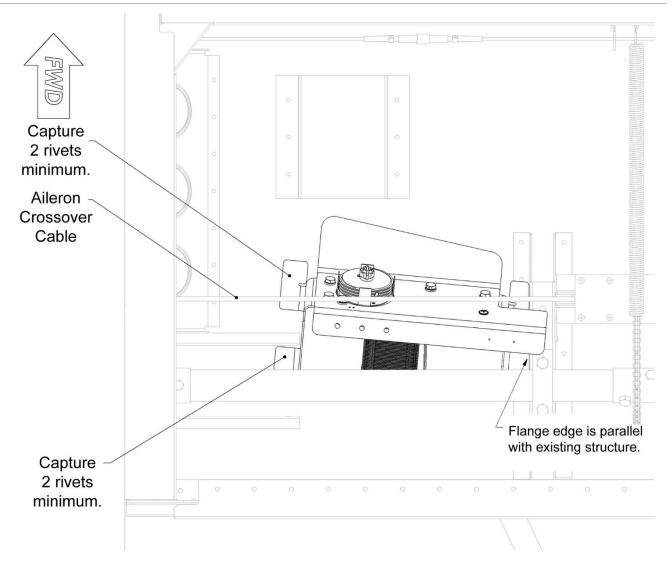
Roll Servo Base and Mount Bracket Fastener Attachment Considerations
